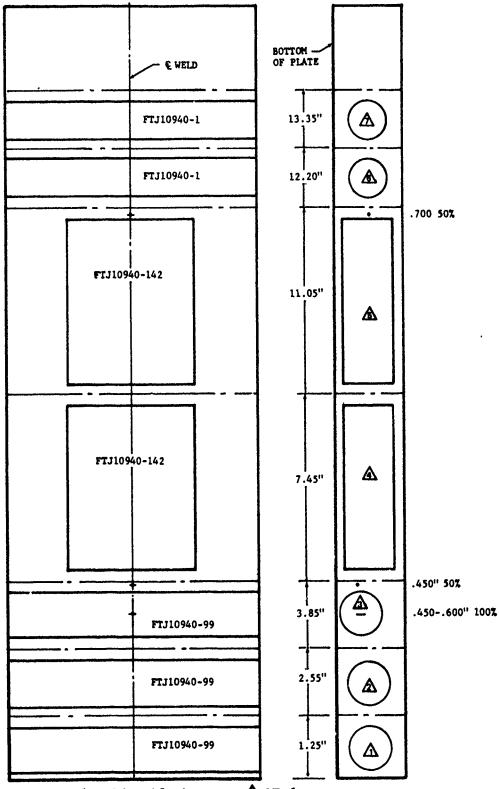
TEST PLATES WELDED BY MURDOCK
